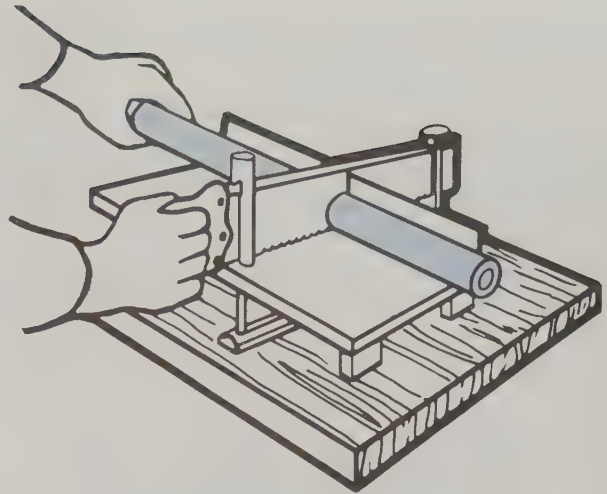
For clean, square-cut pipe ends, use of a miter box is recommended. A fine-tooth sawblade will give the best results. (Nibco)
